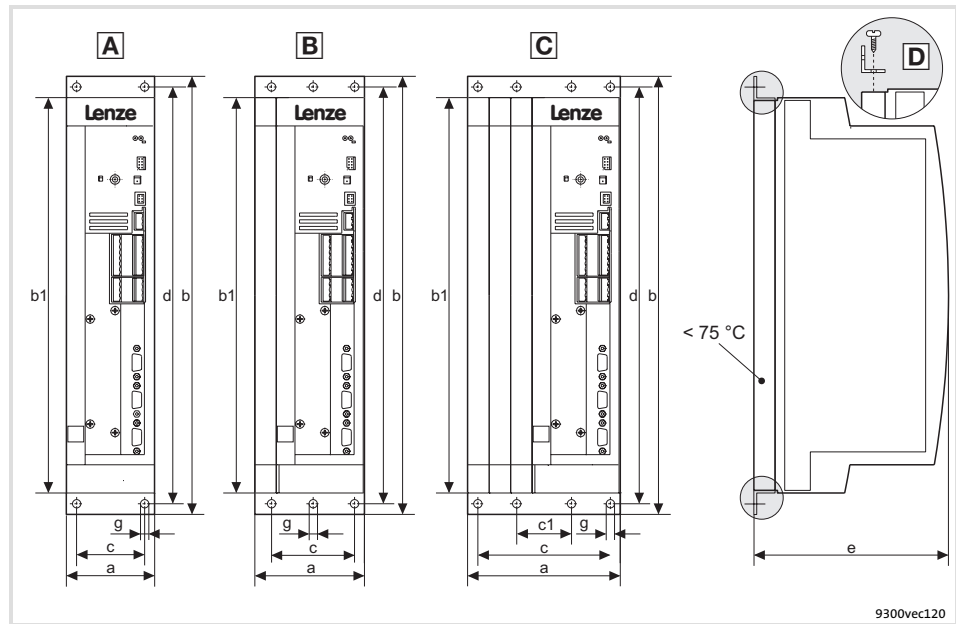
Dimensions for mounting in "cold plate" technique 0.37 ... 11 kW
